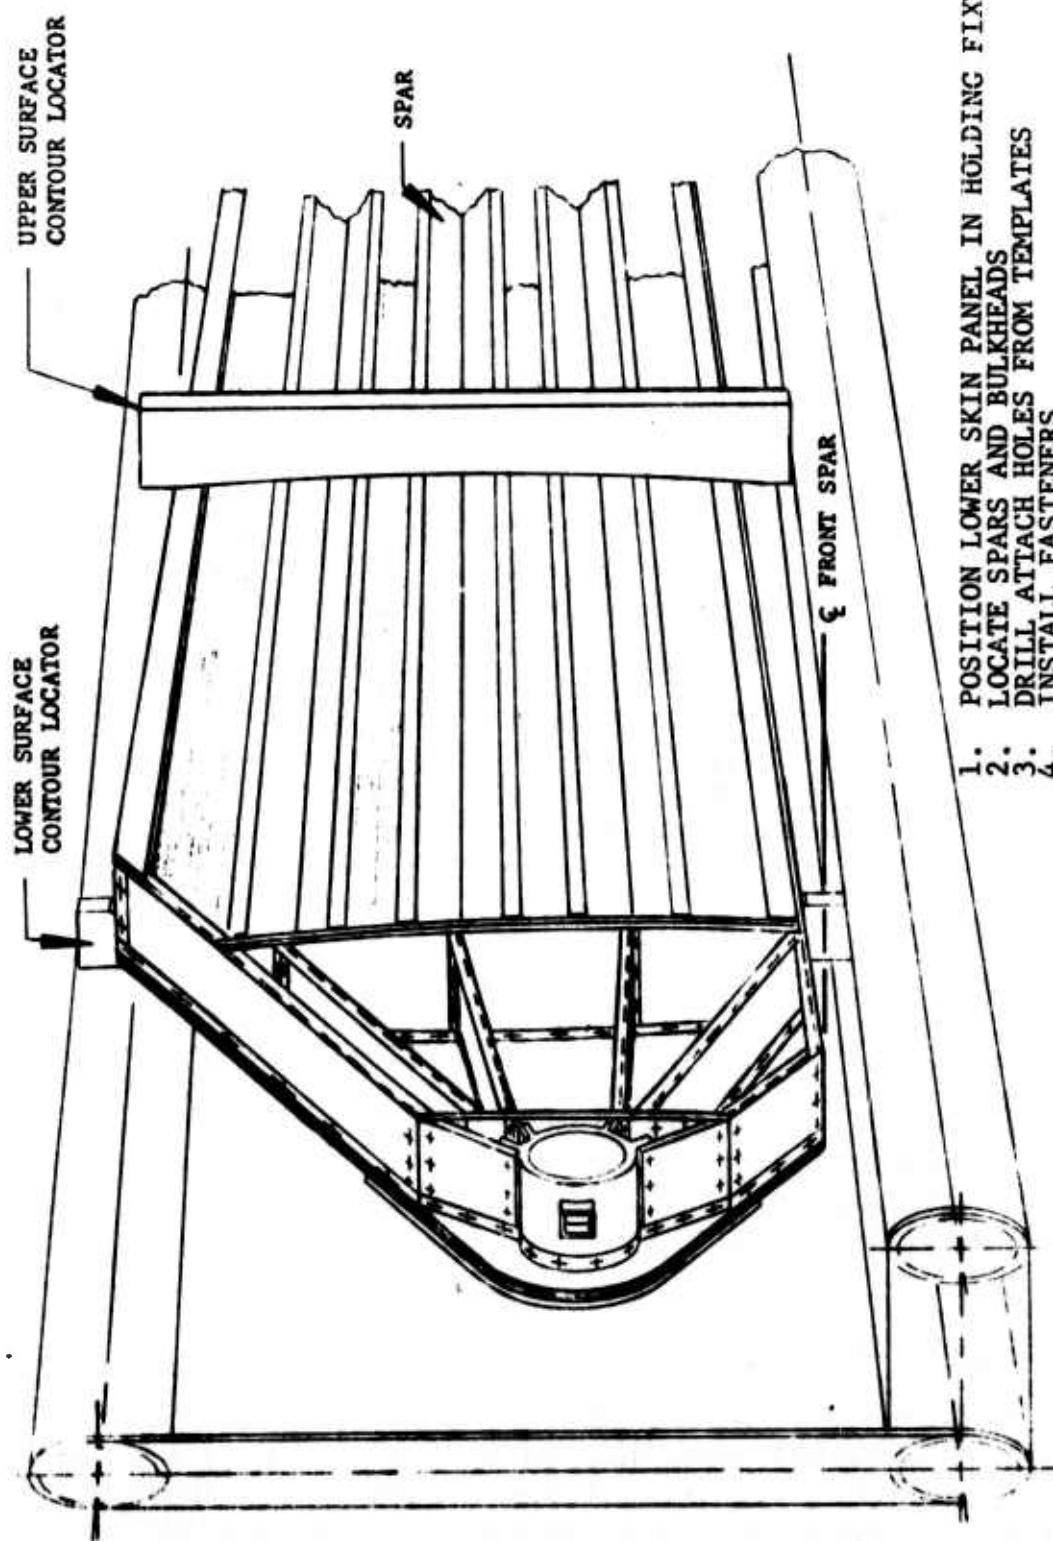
Secondary Manufacturing Lower Skin Panel and Understructure Assembly
